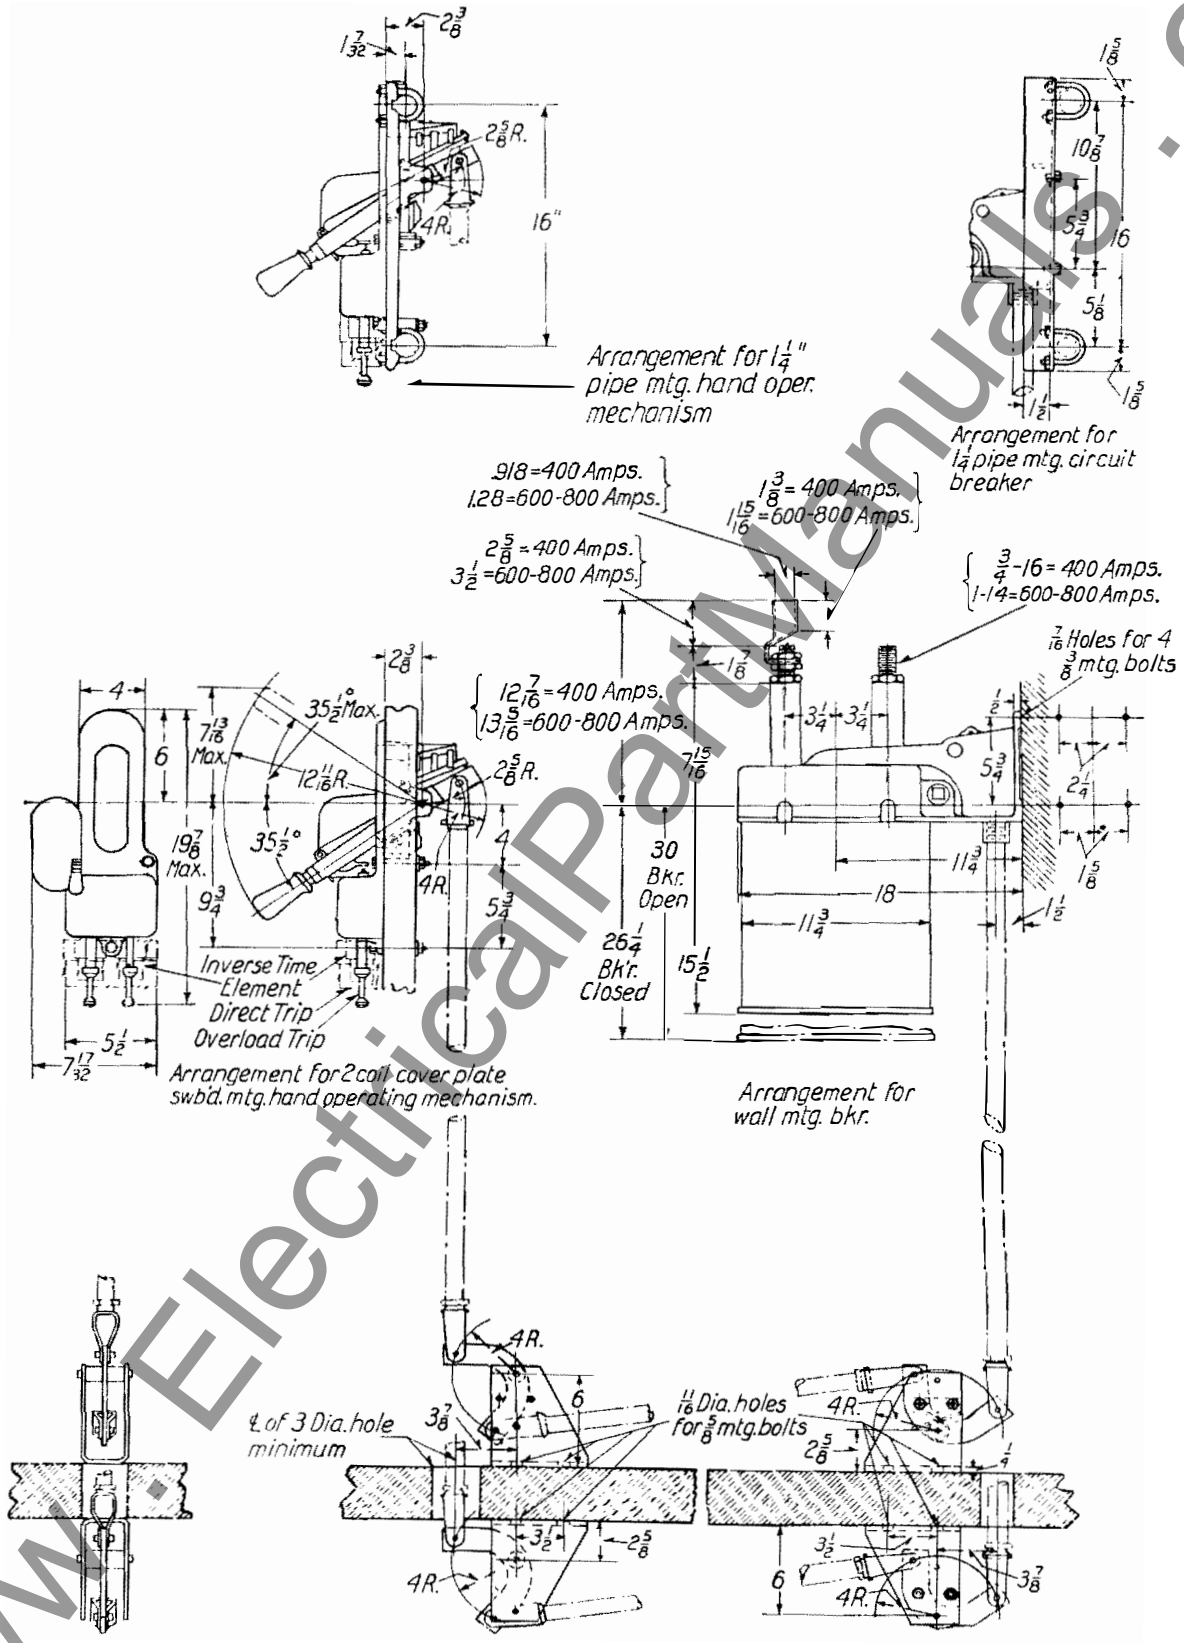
REMOTE CONTROL MOUNTING DETAILS
